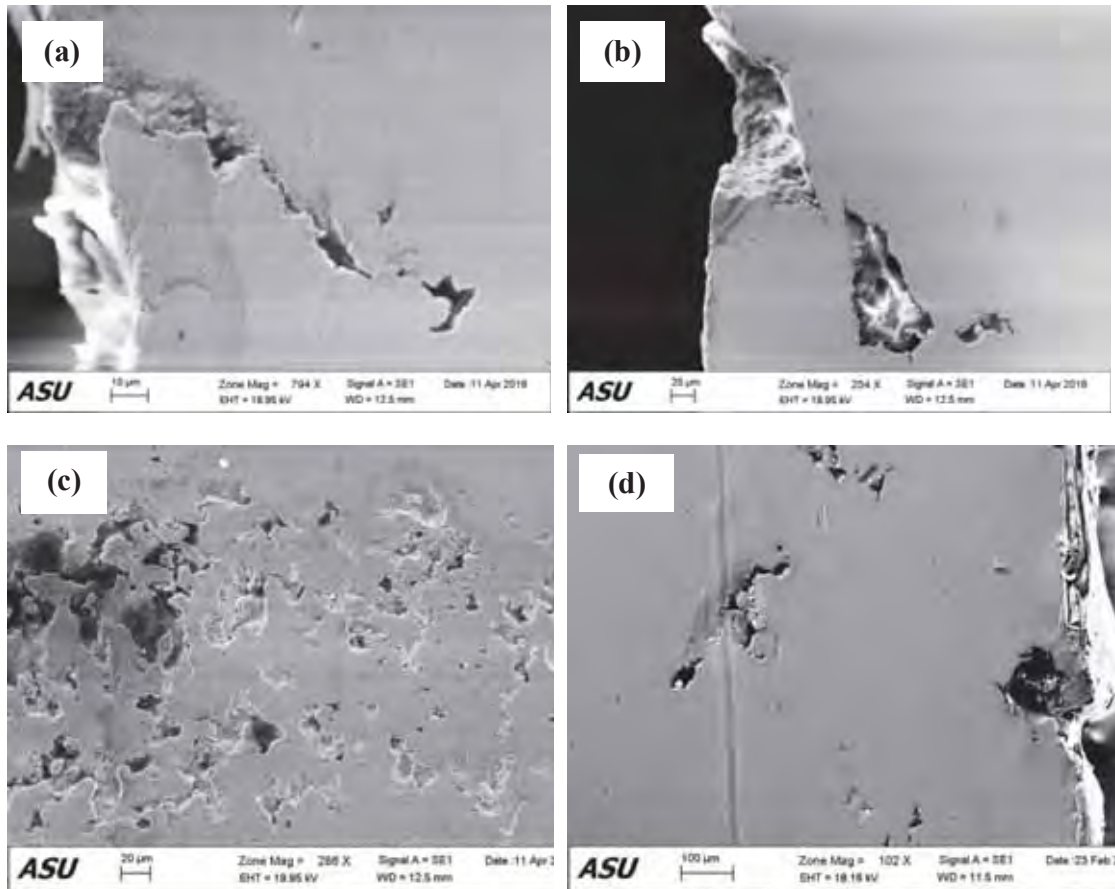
Test specimen with creep dominated failure (i.e. 900 s hold) shows (a), (b) linkage of surface cracks with sub-surface voids; (c) , (d) extensive void coalescence near fracture surface.
